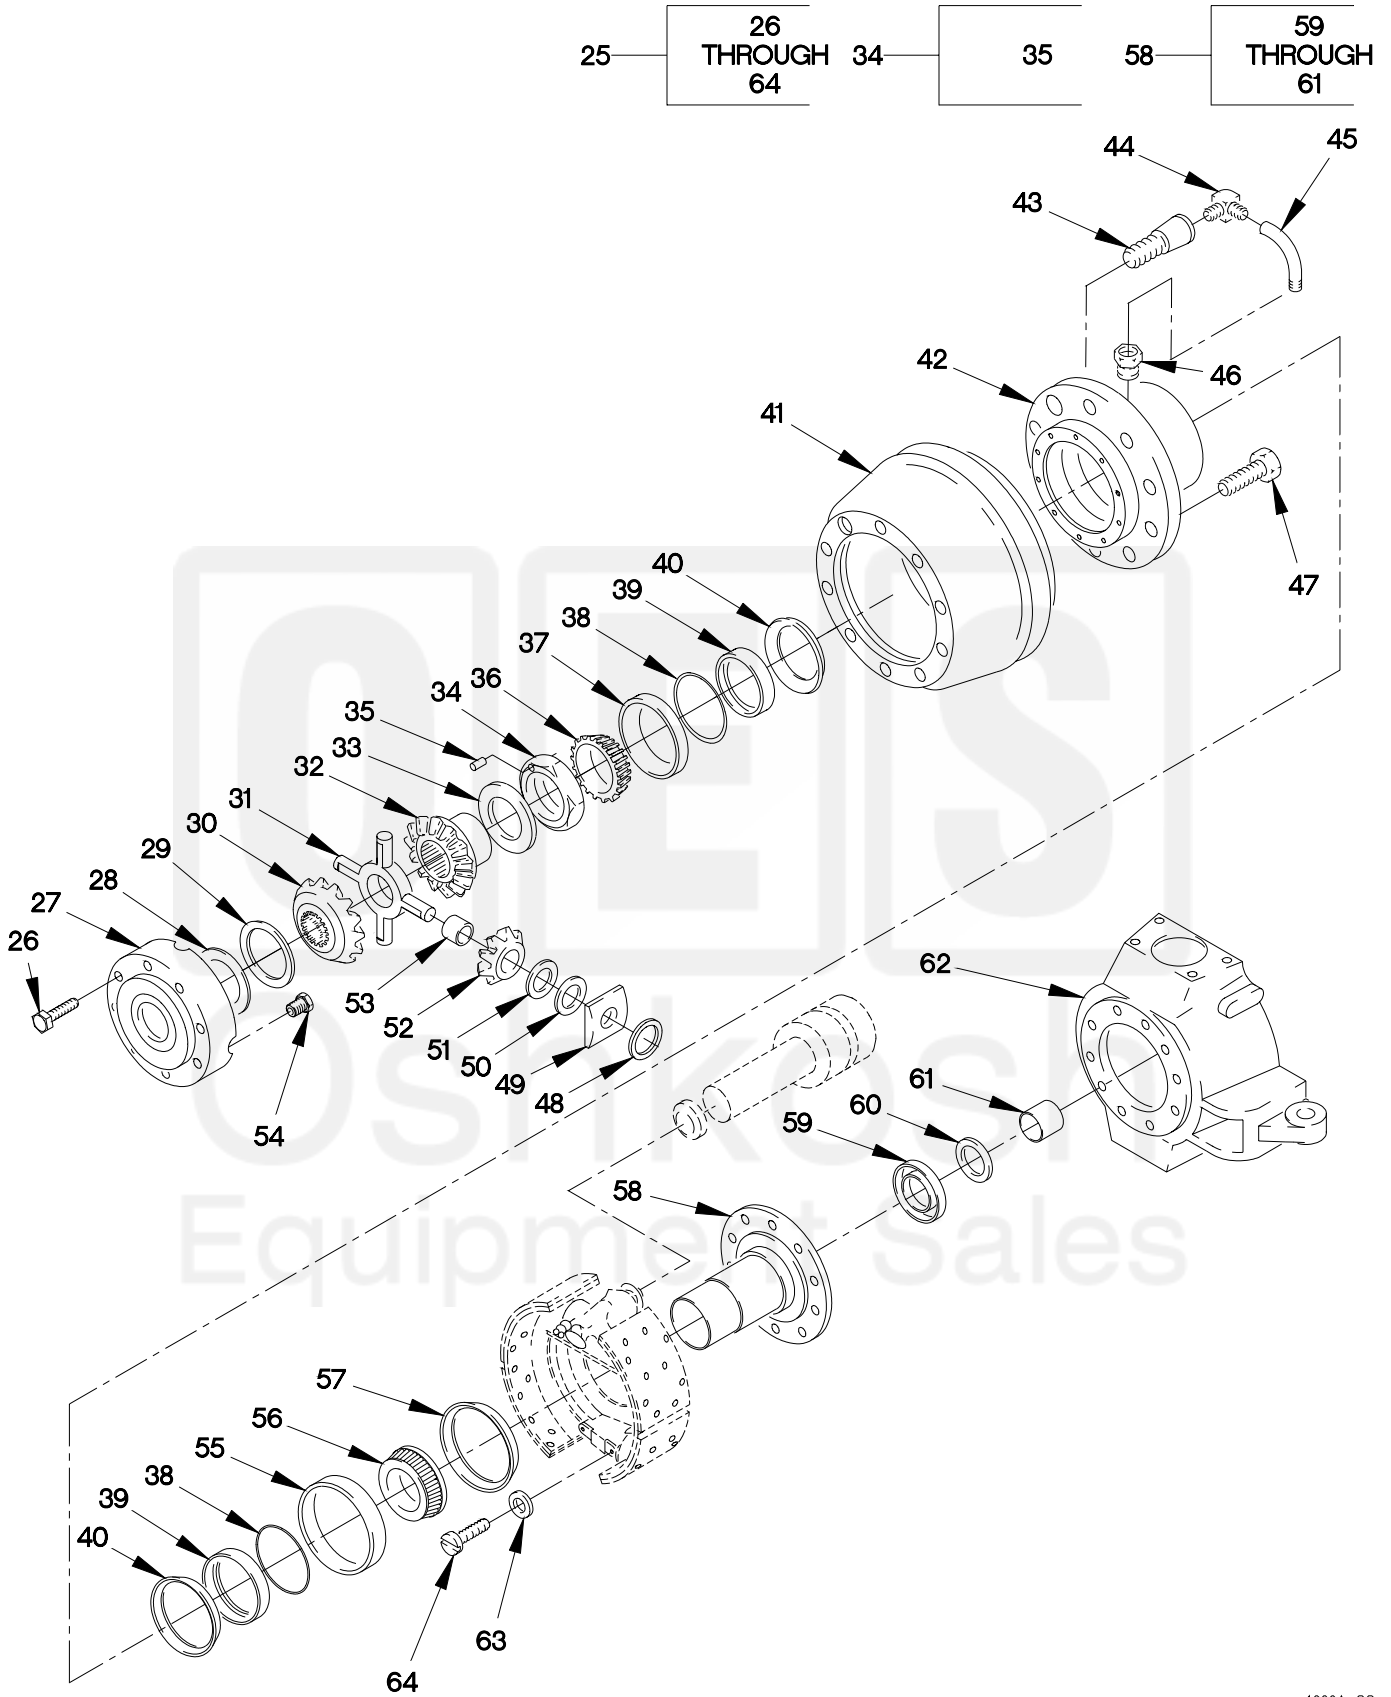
FRONT AXLE AND WHEEL END ASSEMBLY (SHEET 1 OF 2)
